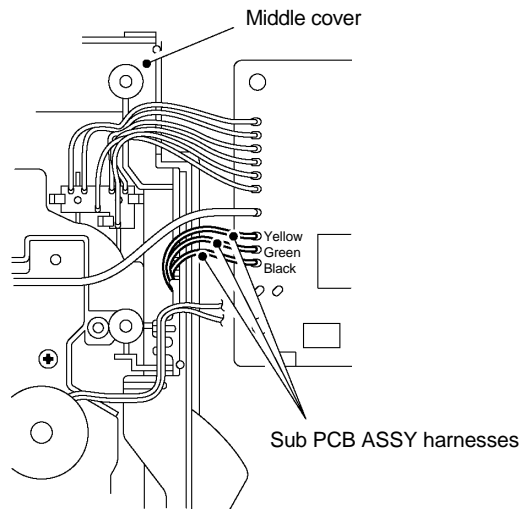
Assembling the Main PCB ASSY (1)
